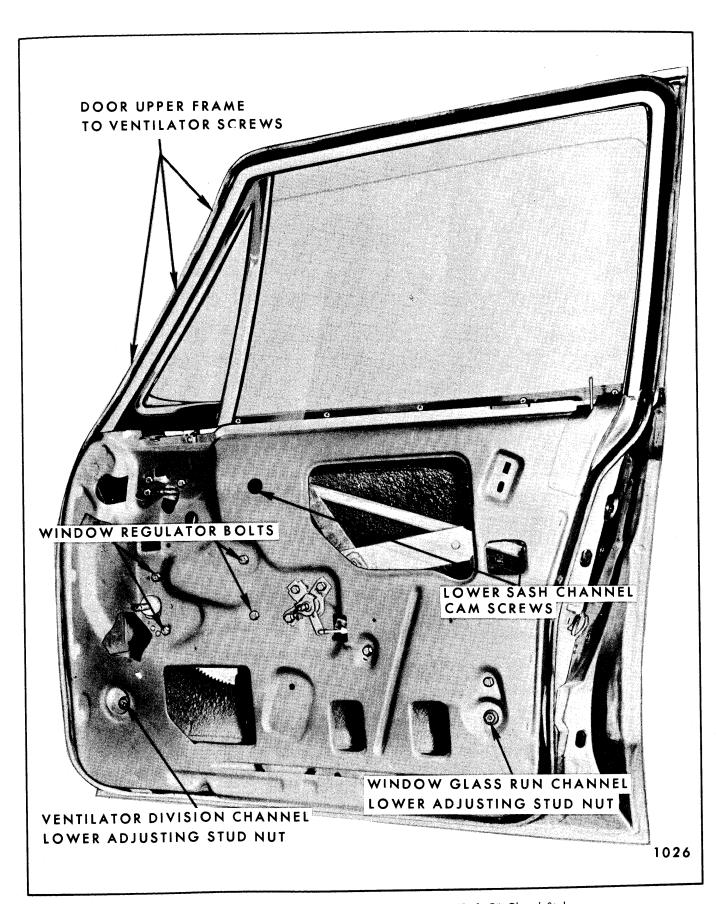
Door Ventilator and Regulator Attachment - "B & C" Closed Styles
